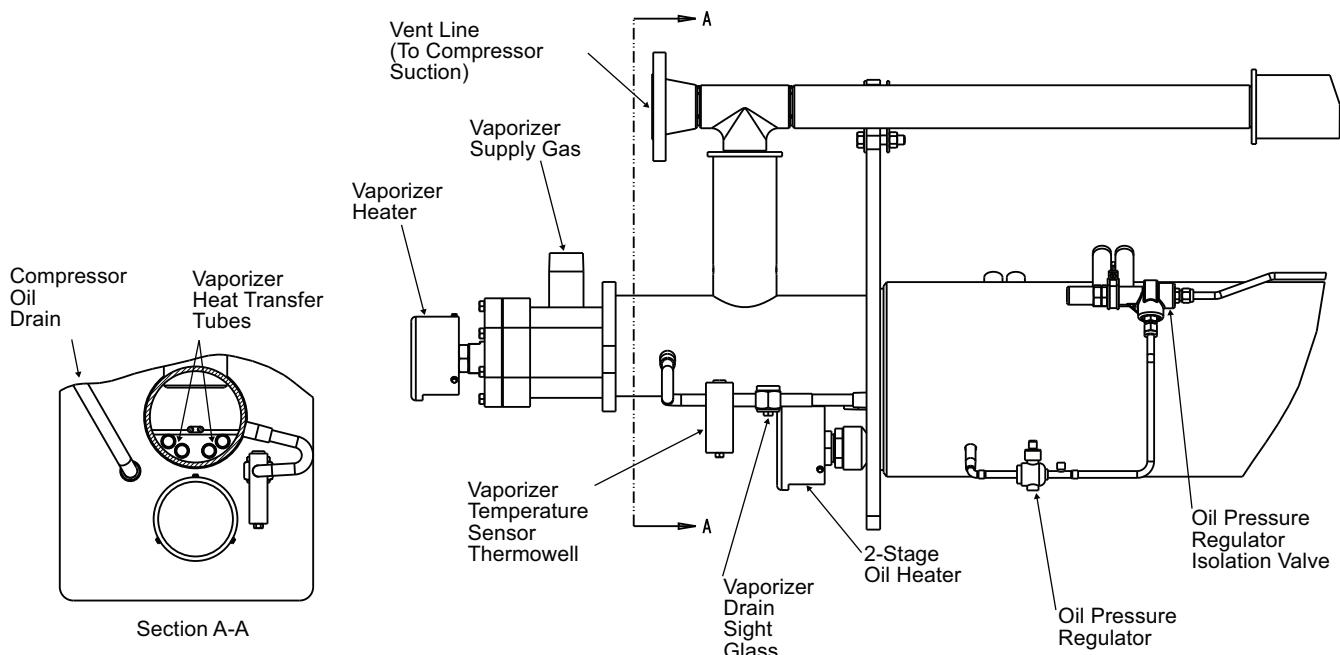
Oil Reclaim Cross Section (Q, R Compressors Shown)
